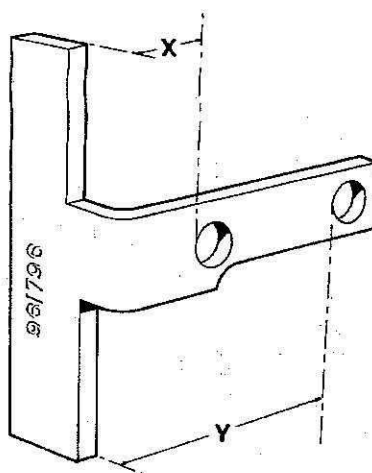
Adjusting gage (David Brown part No. 961796) for hydraulic control mechanism. Dimension "X" is 0.437; dimension "Y" is 1.580.
